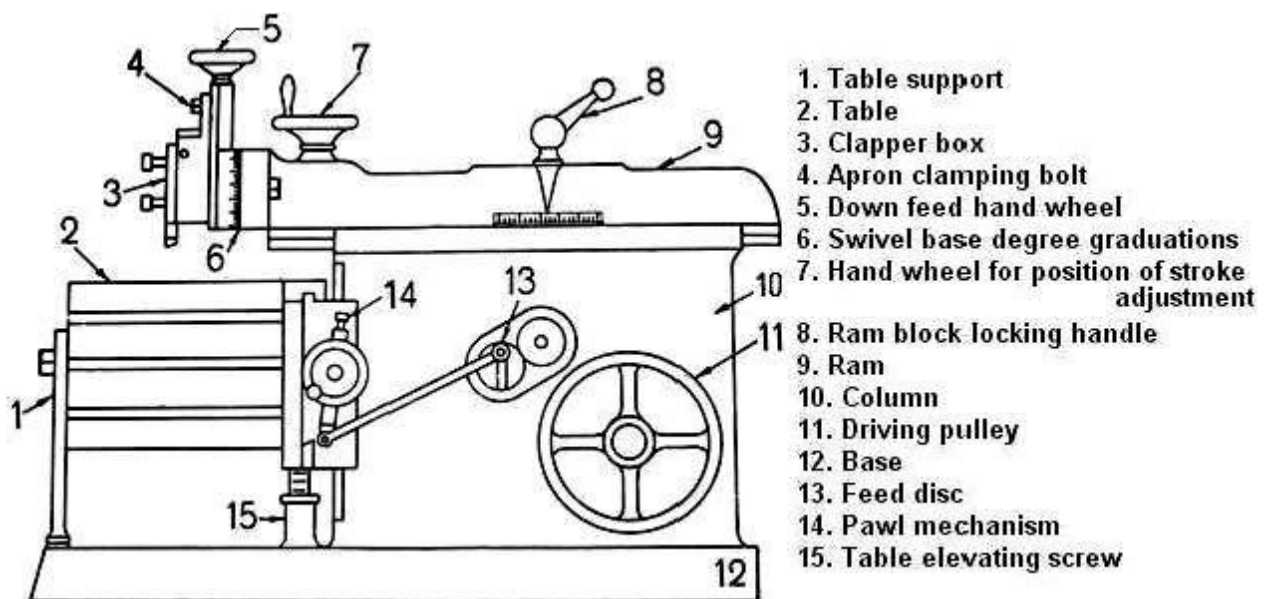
shows the basic configuration of a standard shaper. The major parts are:
